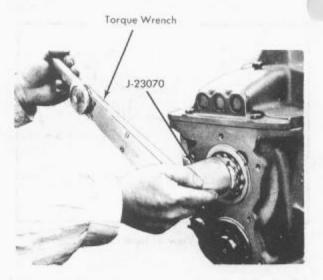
Removal or Installation of Mainshaft Rear Bearing Lock Nut (4-WD)
